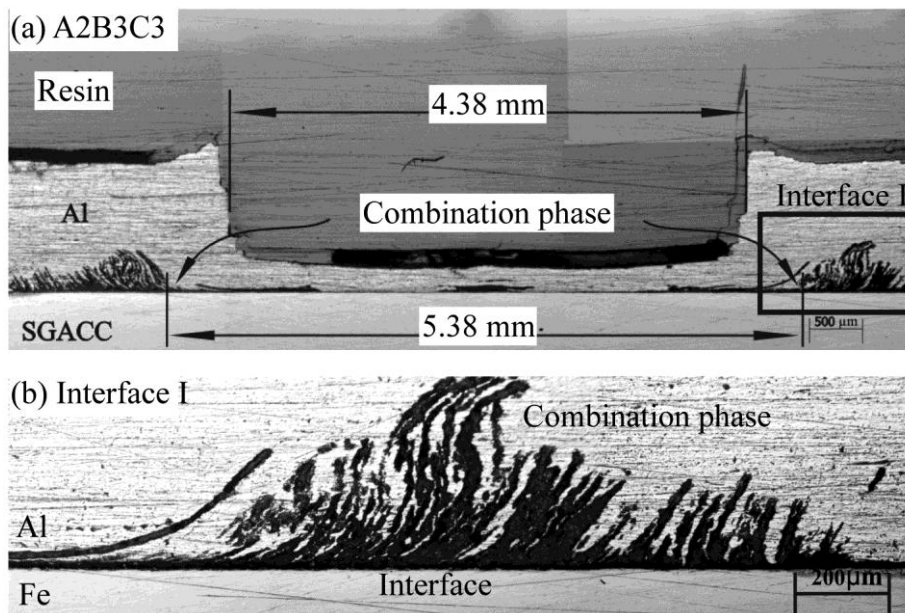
Interface structure of the lap joint produced by the optimized welding parameter.
